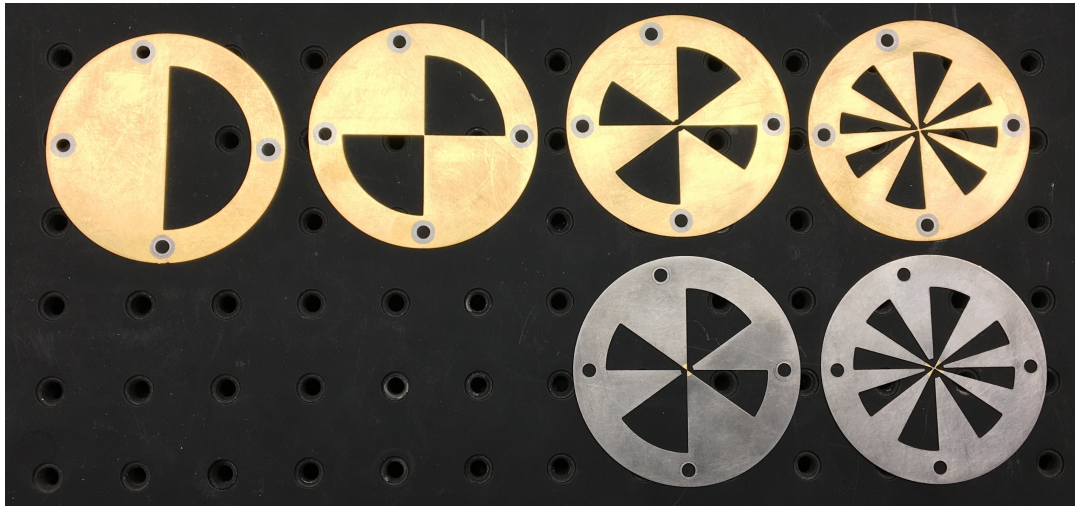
Aluminum masks for 2" OASPM manufacturing. The masks have been CNC waterjet cut from 1/16" aluminum sheet.
